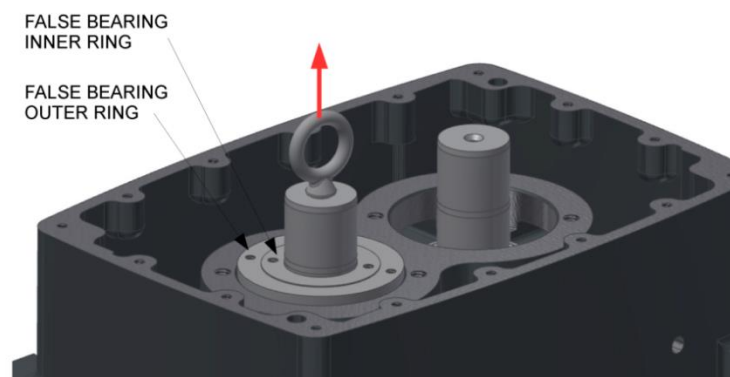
MEASURE STEP IN FALSE BEARING
